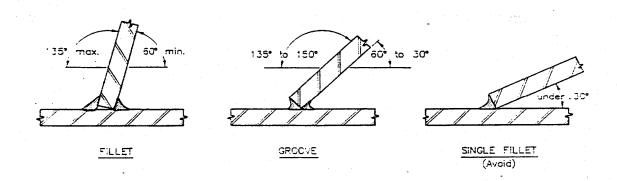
T JOINT WELD LIMITS
